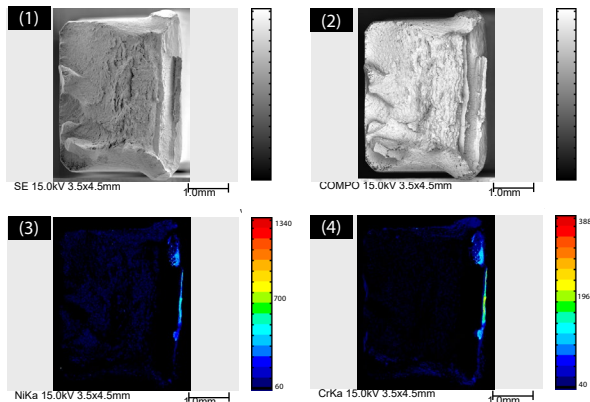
Observation Images of Test Specimen B Fracture Surface (SS400 Side) Using EPMA
